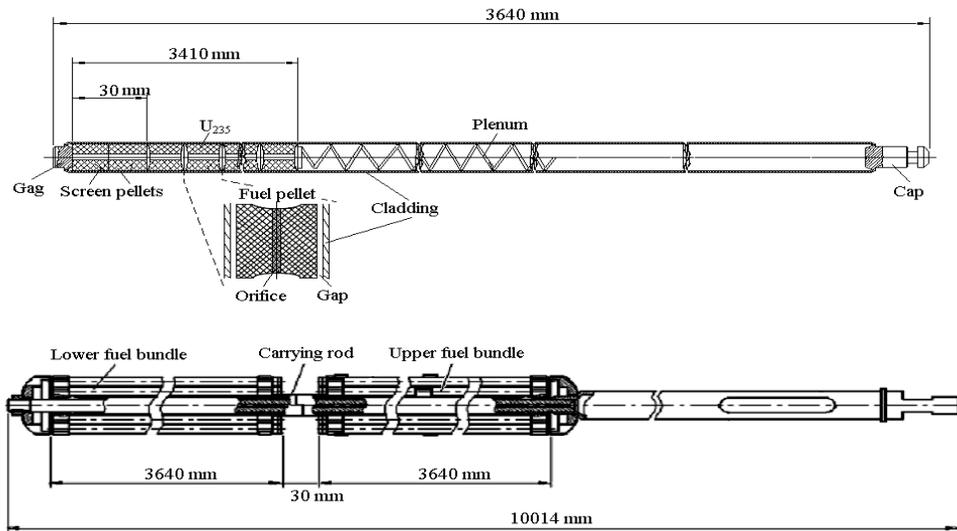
Fuel assembly and fuel rod of RBMK-1500 [2]
